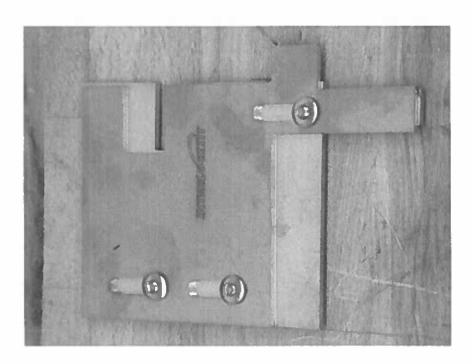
K-6510 INTERLOCK KIT (Rear View)
